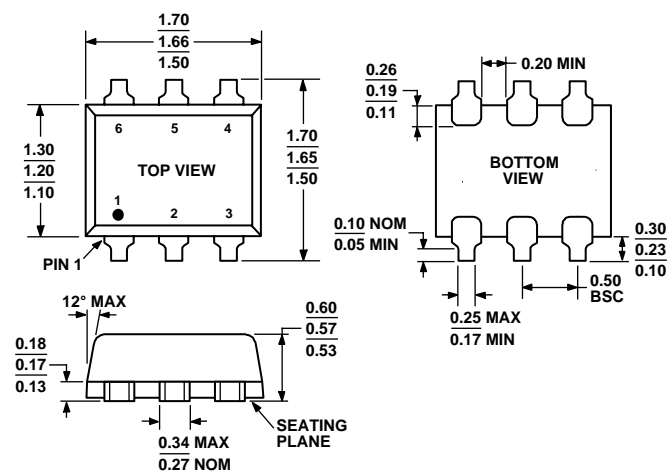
6-Lead Small Outline Transistor Package [SOT-66]
